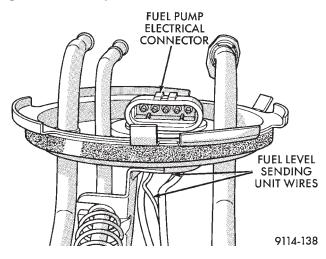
Fuel Pump Electrical Connector—Front Wheel Drive
